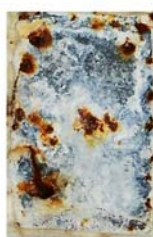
Surface appearance of the welding samples after combined cyclic corrosion test for 141 cycles.
